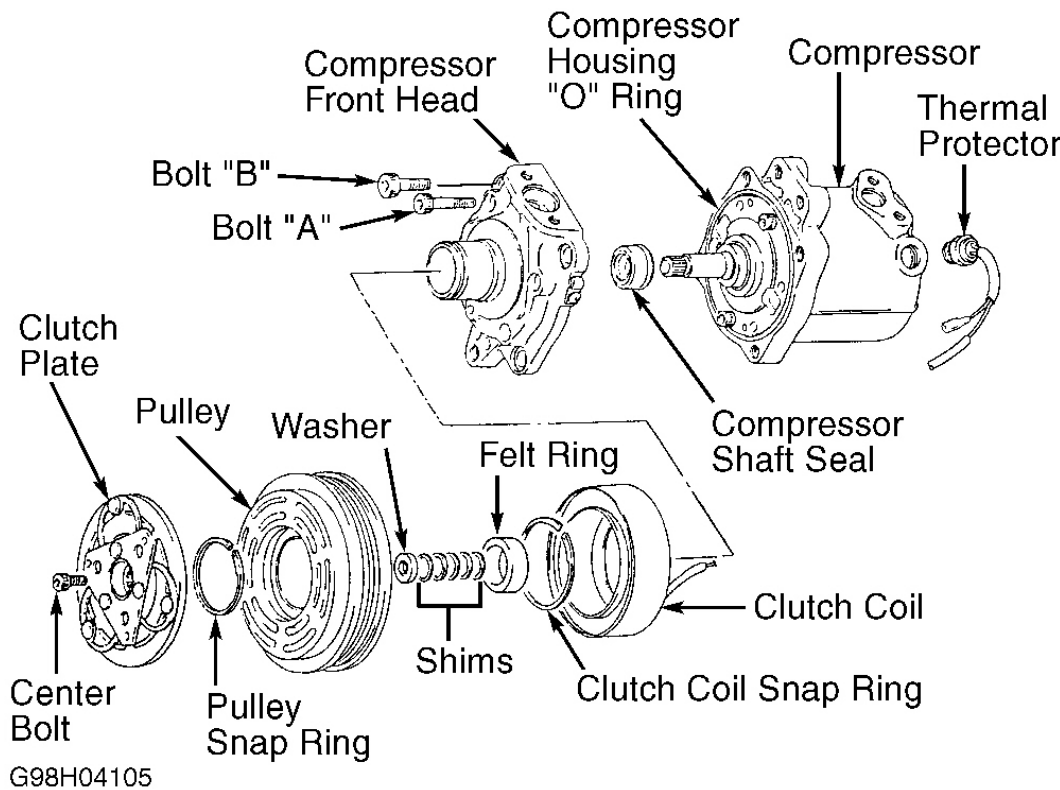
Exploded View Of Compressor (Seiko-Seiki Rotary Vane)
